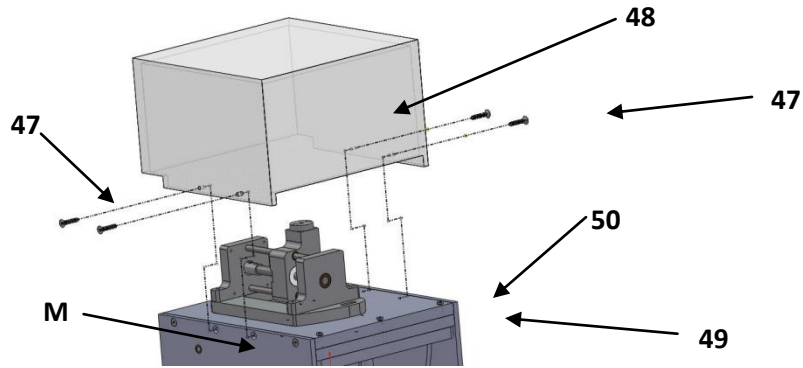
Chassis Assembly [4 of 4] (O) – (M, 47, 48, 49)
